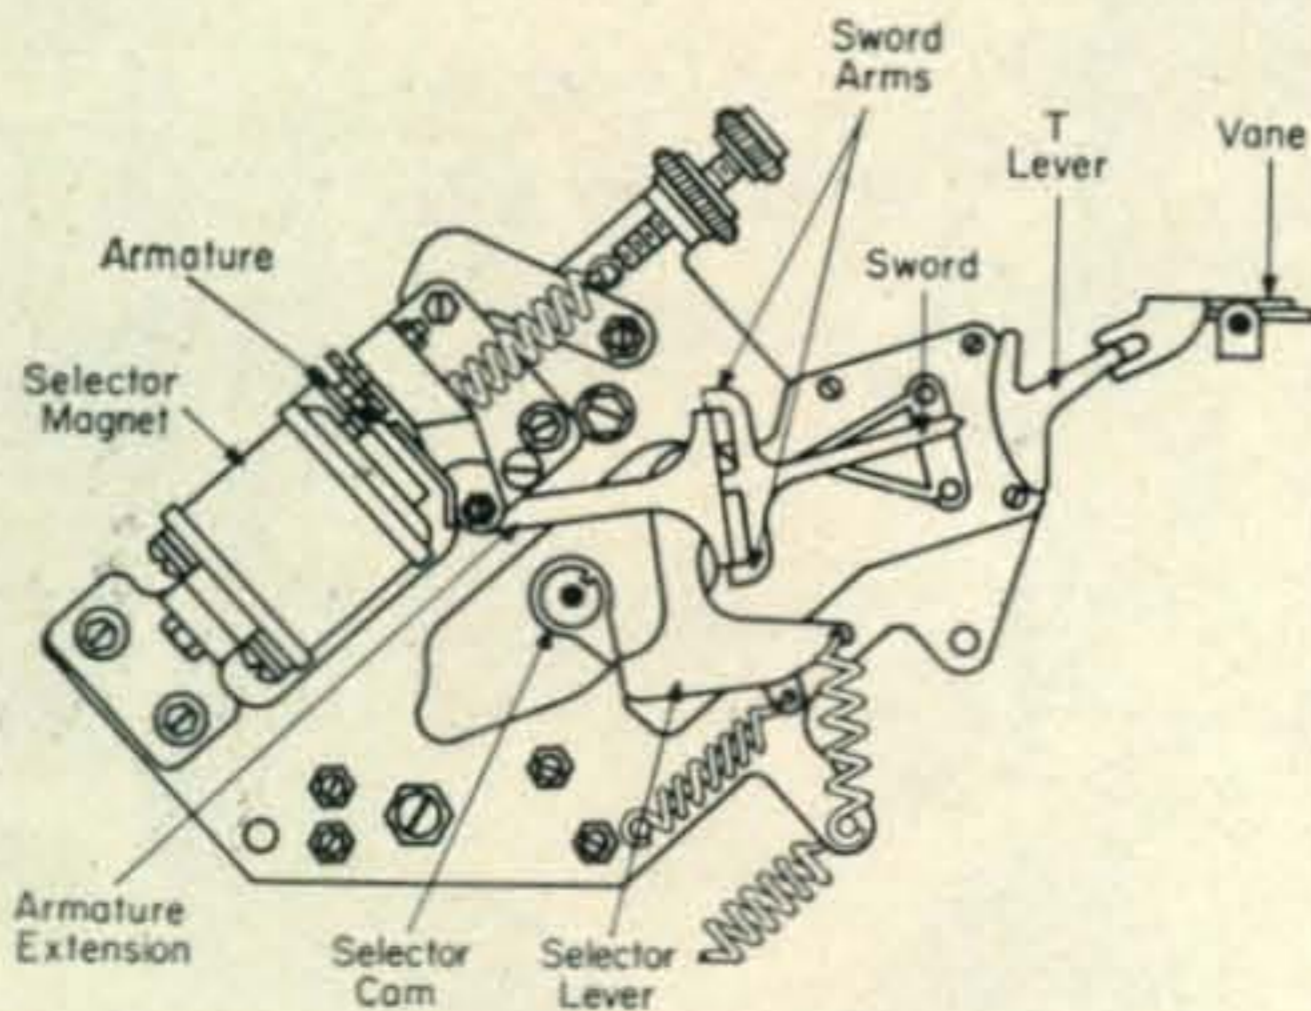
Side view of the selector unit from the Model 15, identifying the various parts.
